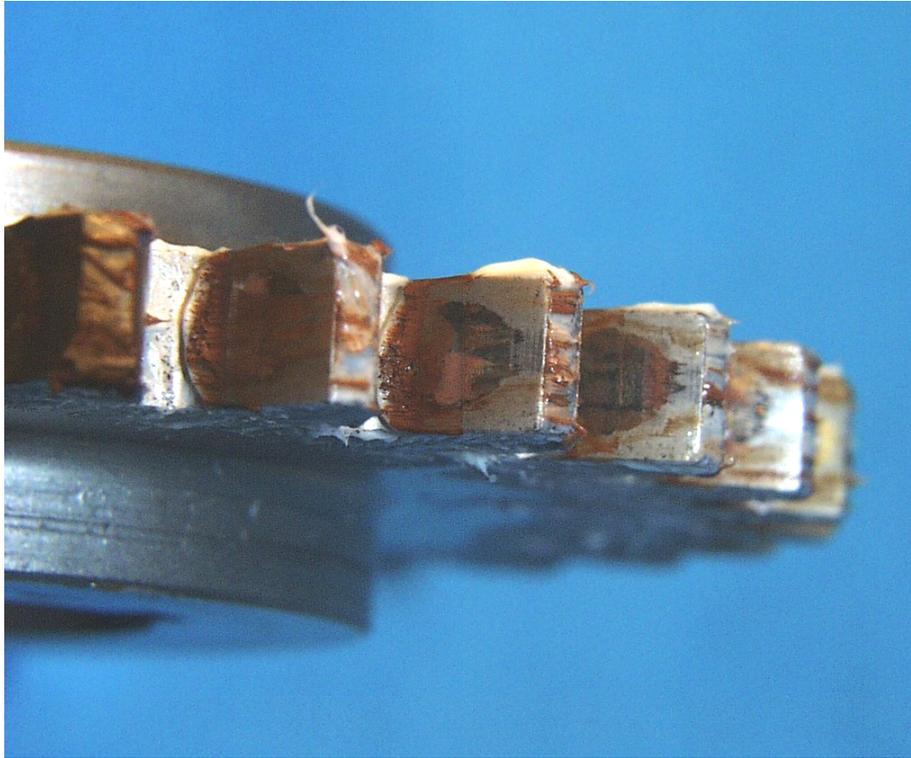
Condition of the driven gear after 16 hr of testing for test number 5 having test conditions of perfluoro type grease, 214 rpm shaft speed, 5 ft-lb torque, and dry air atmosphere.
